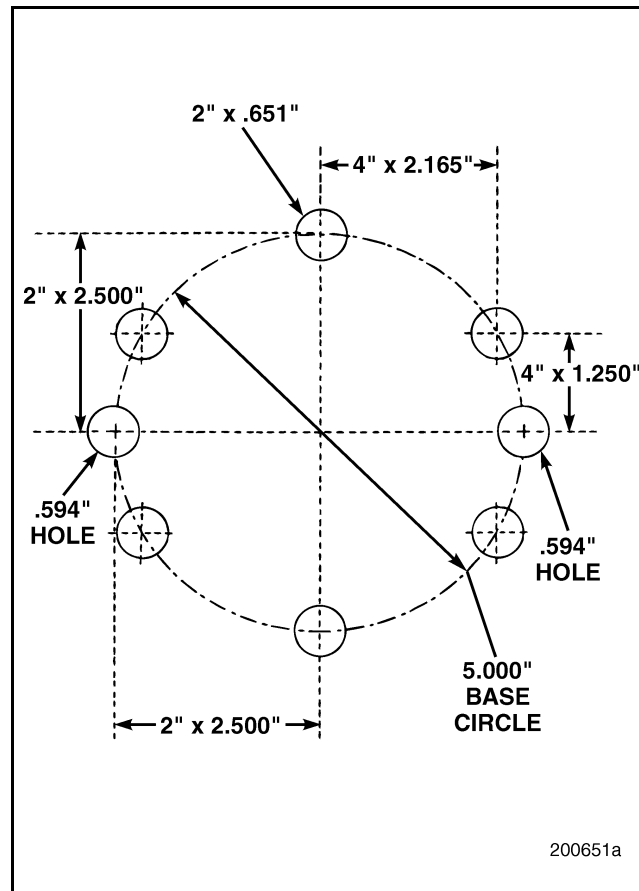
Dowel Pin Hole Dimensions (Flywheel or Torque Converter Drive Flange)
